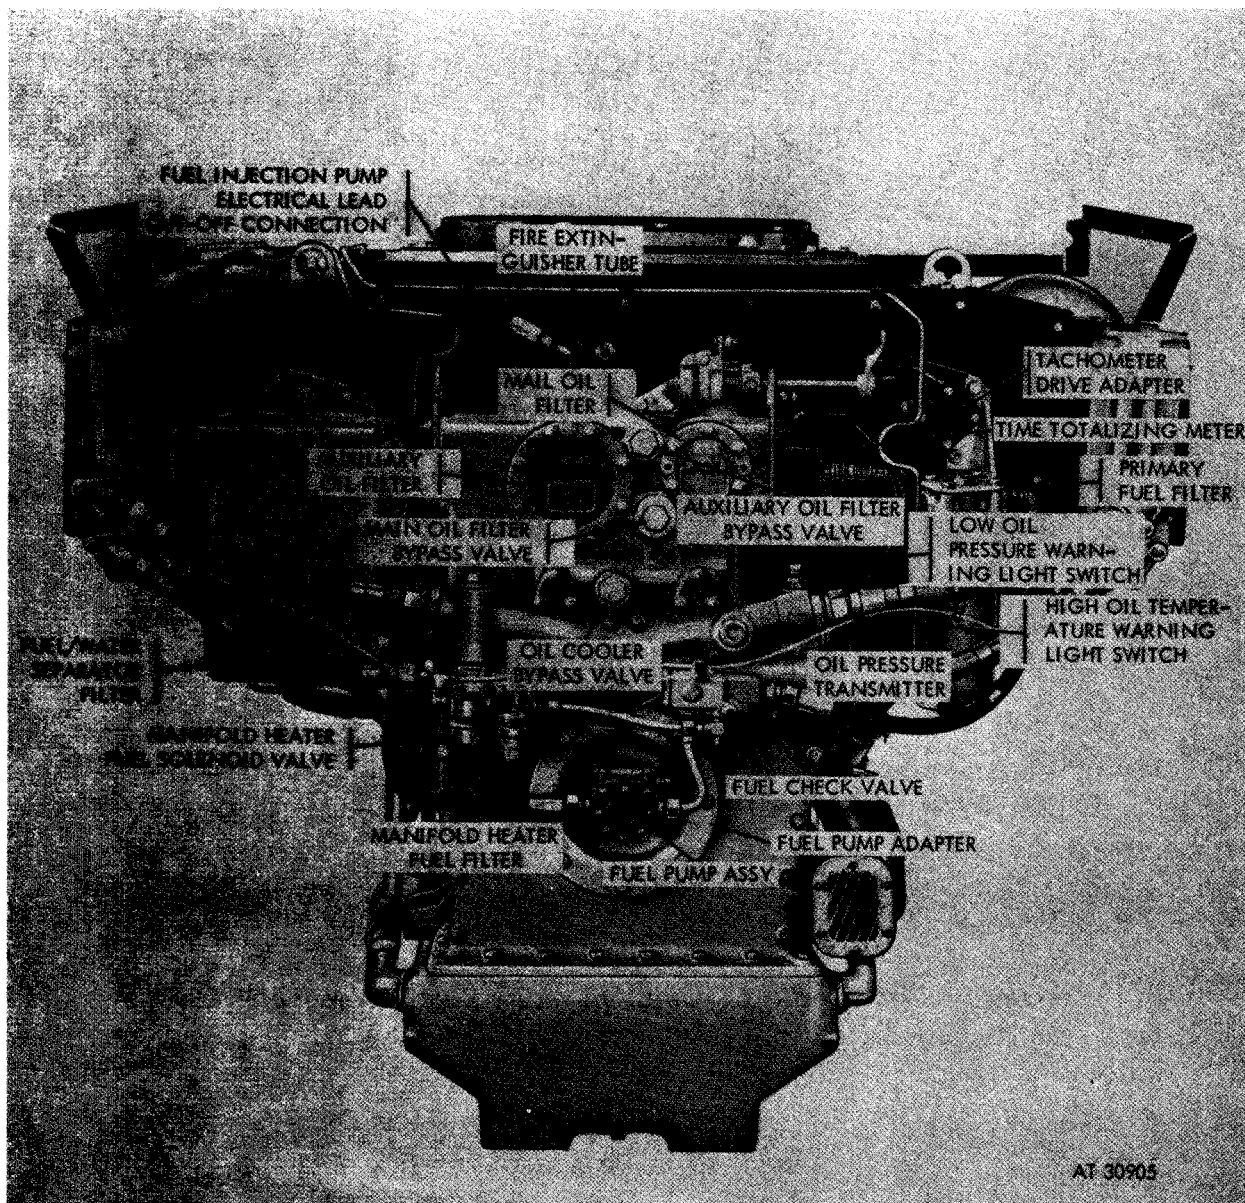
AVDS-1790-2A engine assembly with fuel/ water separator filter-front view.
